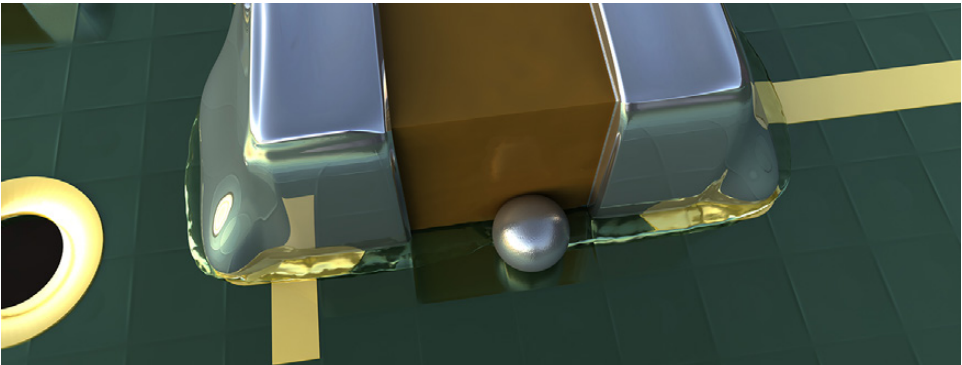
A solder ball formed after reflow on a passive discrete component.
